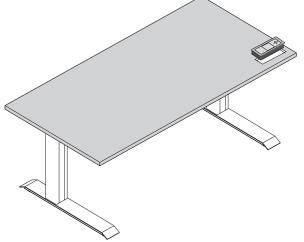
Attaching LegaDrive Touch Inlay handset to example desk
